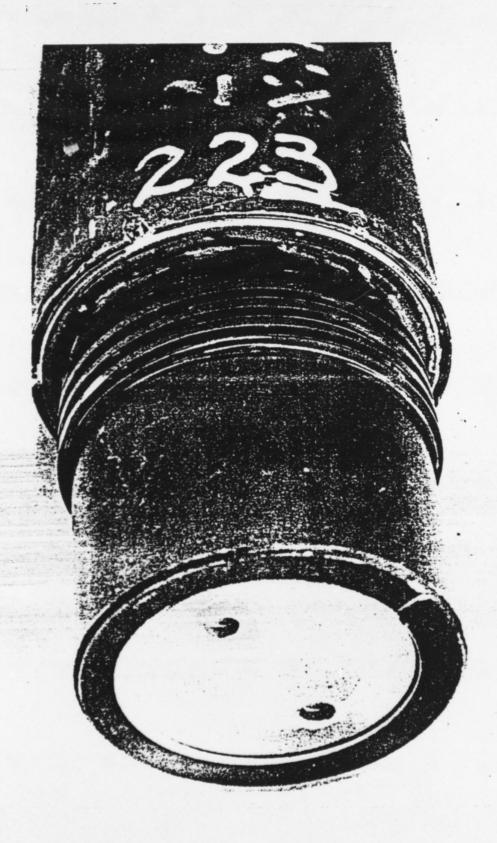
Rd. No. 223. Warhead case pins or rivets sheared and elongated the pinholes in the warhead case assembly after 45° to nose and 45° to base drops.
